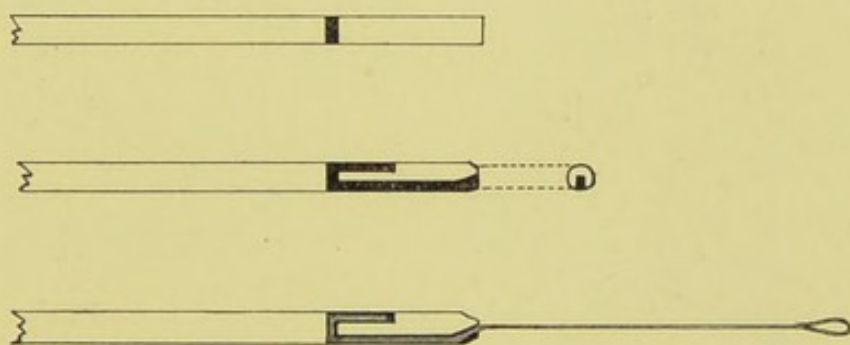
Platinum rod in aluminium handle—method of mounting.
